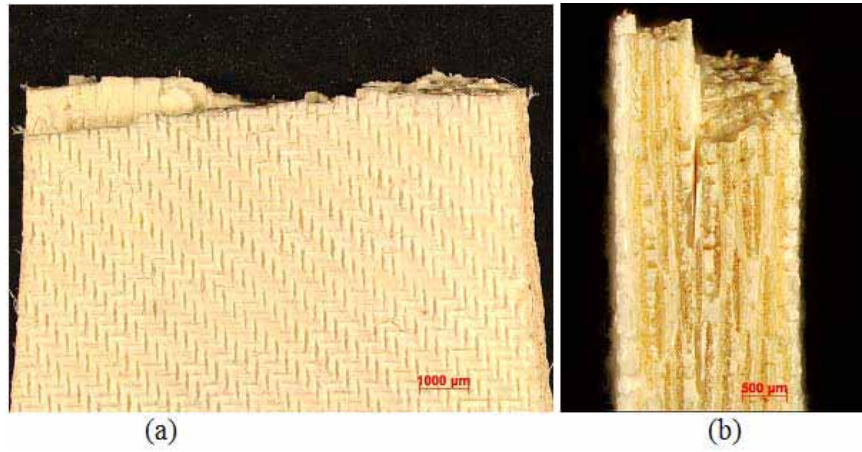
Fracture surface of C5 composite specimen tested in creep at 30 MPa at 1100 °C in steam ($t_f = 16.1$ h): (a) front view and (b) side view.
